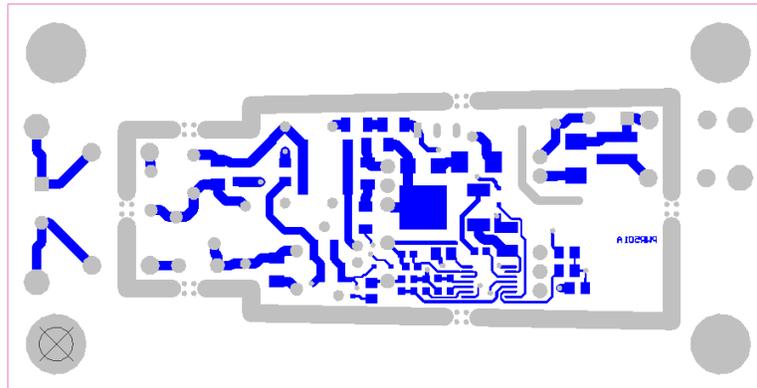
LM3447-PAR-230VEVM Bottom Layer Copper (bottom view)
